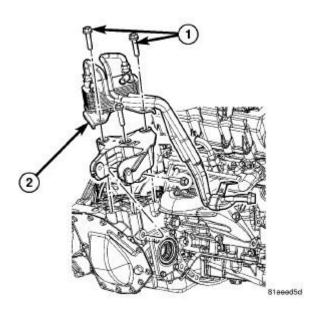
Oil Cooler Fasteners Courtesy of CHRYSLER LLC
